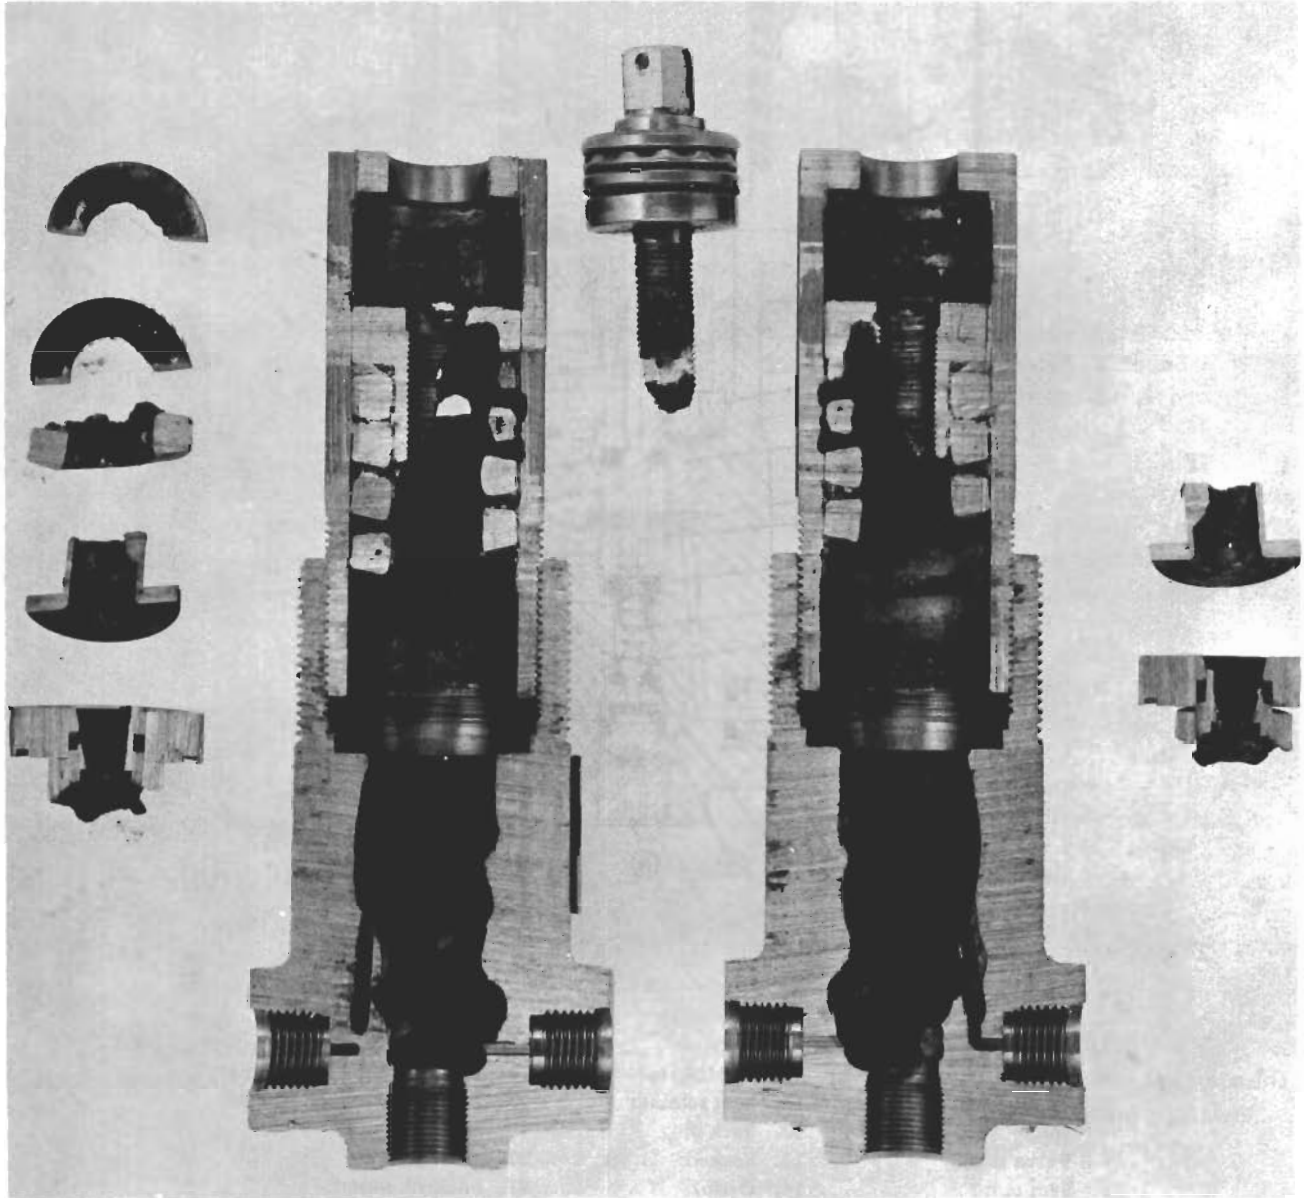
REGULATOR BODY AFTER INTERNAL COMBUSTION AND BURNOUT
